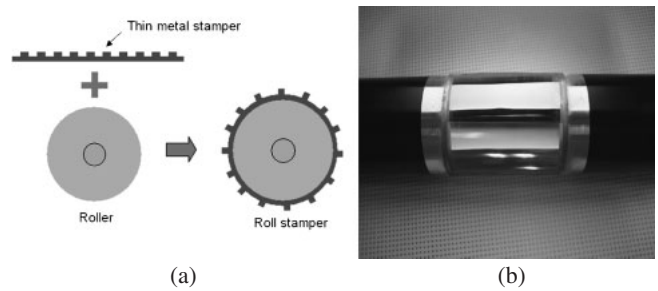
(a) Schematic diagram of the process flow for the roll stamp: A thin metal stamp was fabricated by applying an electroforming process to the machined convex pyramid pattern. The electroformed thin metal stamp with a thickness of 210 μm was then wrapped around the aluminum roll base. (b) Image of a manufactured roll stamp with length 210 mm and diameter 50 mm.
